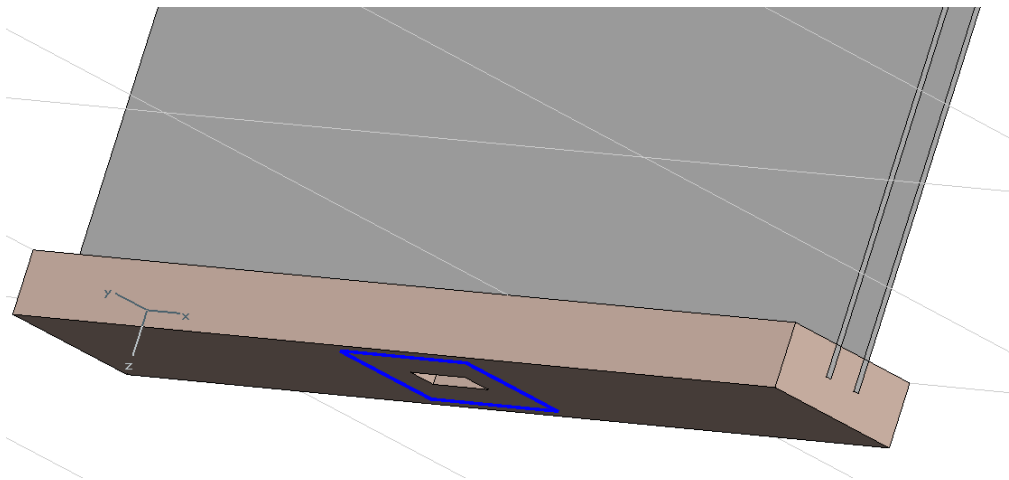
Design of the metal piece with the aluminum plates already inserted
